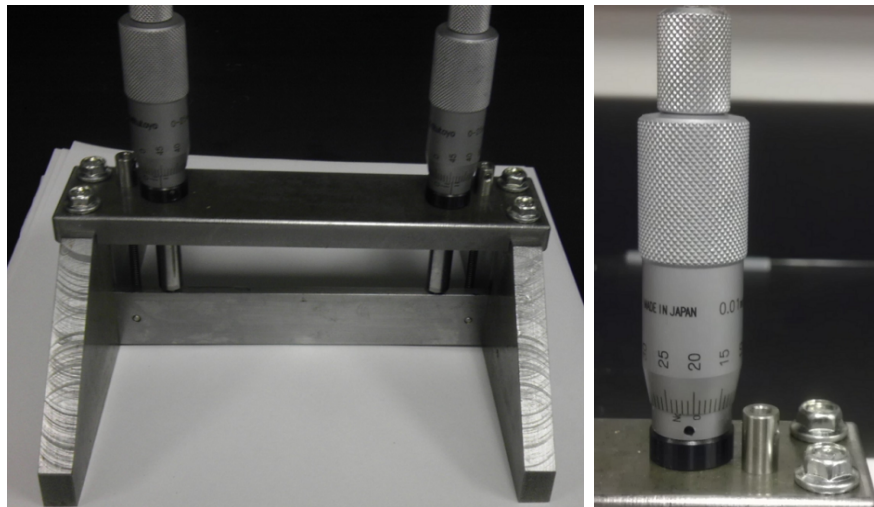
The Design of Doctor Blade Fixture and Micrometer Head
